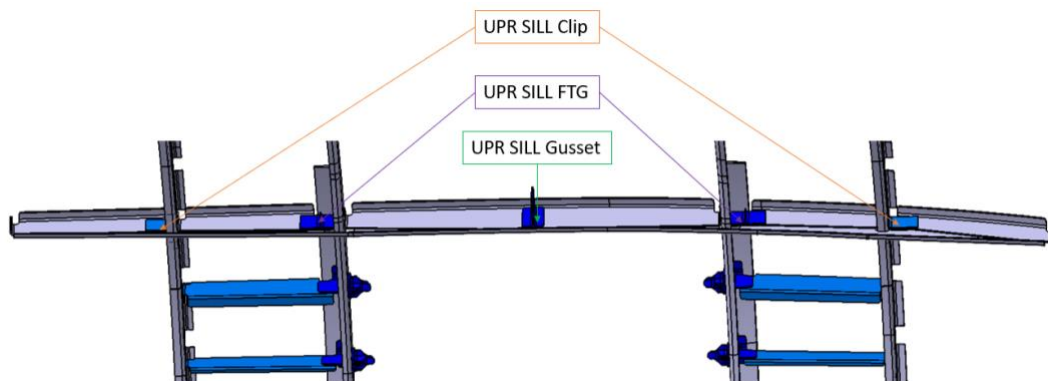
Placement of outer sill components onto inner sill at frame intersections
